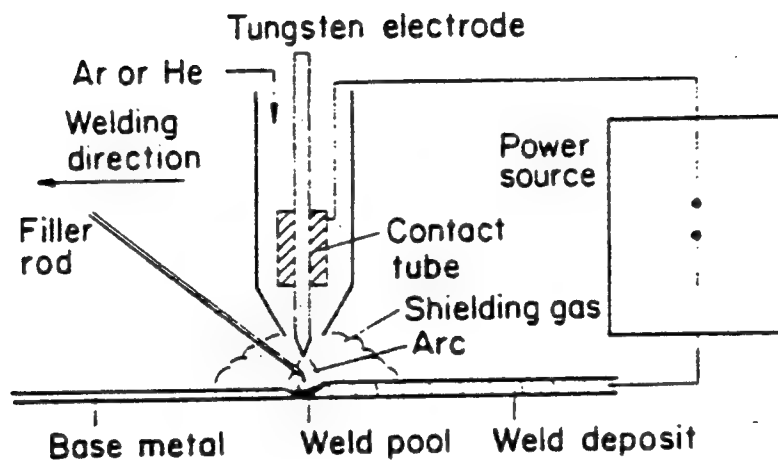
GTA welding process [Kou, 1987]
